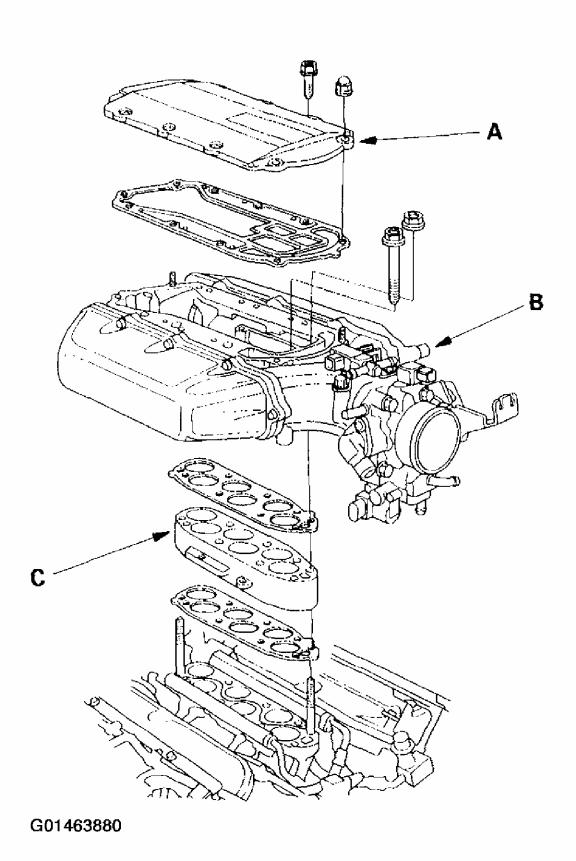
Removing The Upper Cover, The Intake Manifold & Spacer
